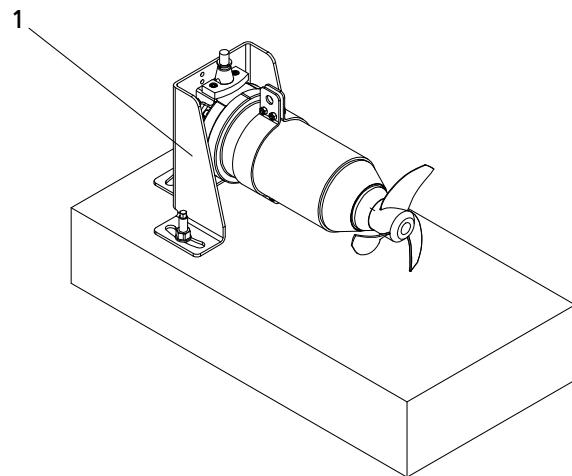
Installation using accessories set 6: permanent mounting of submersible mixer on tank floor
